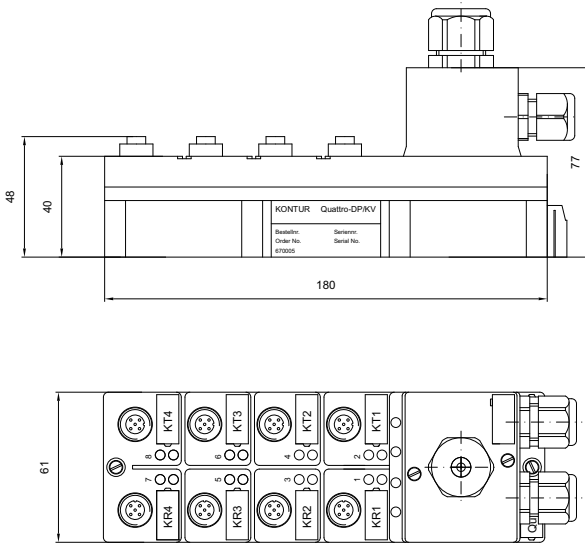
Dimensioned drawing of QUATTRO DP/KV control device:
